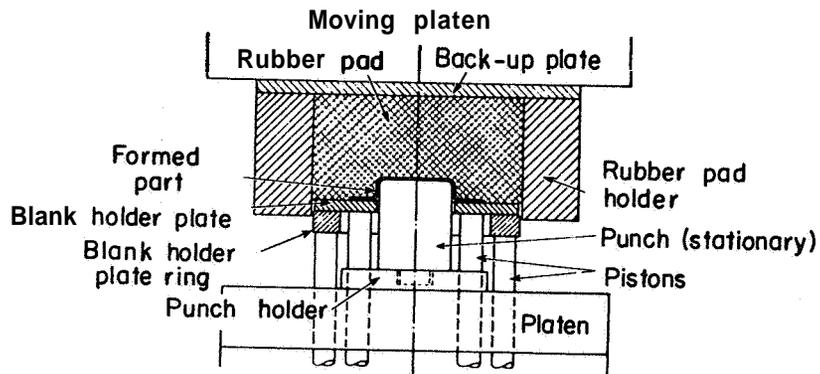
MARFORMING PROCESS (Ref. 3)
